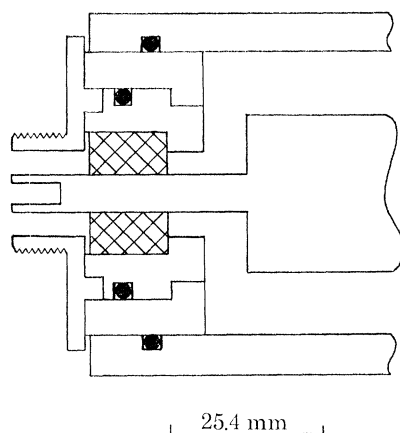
Detail of coaxial to slab line transformer and vacuum seals. The shaded central portion denotes the p.t.f.e. support/vacuum seal.
